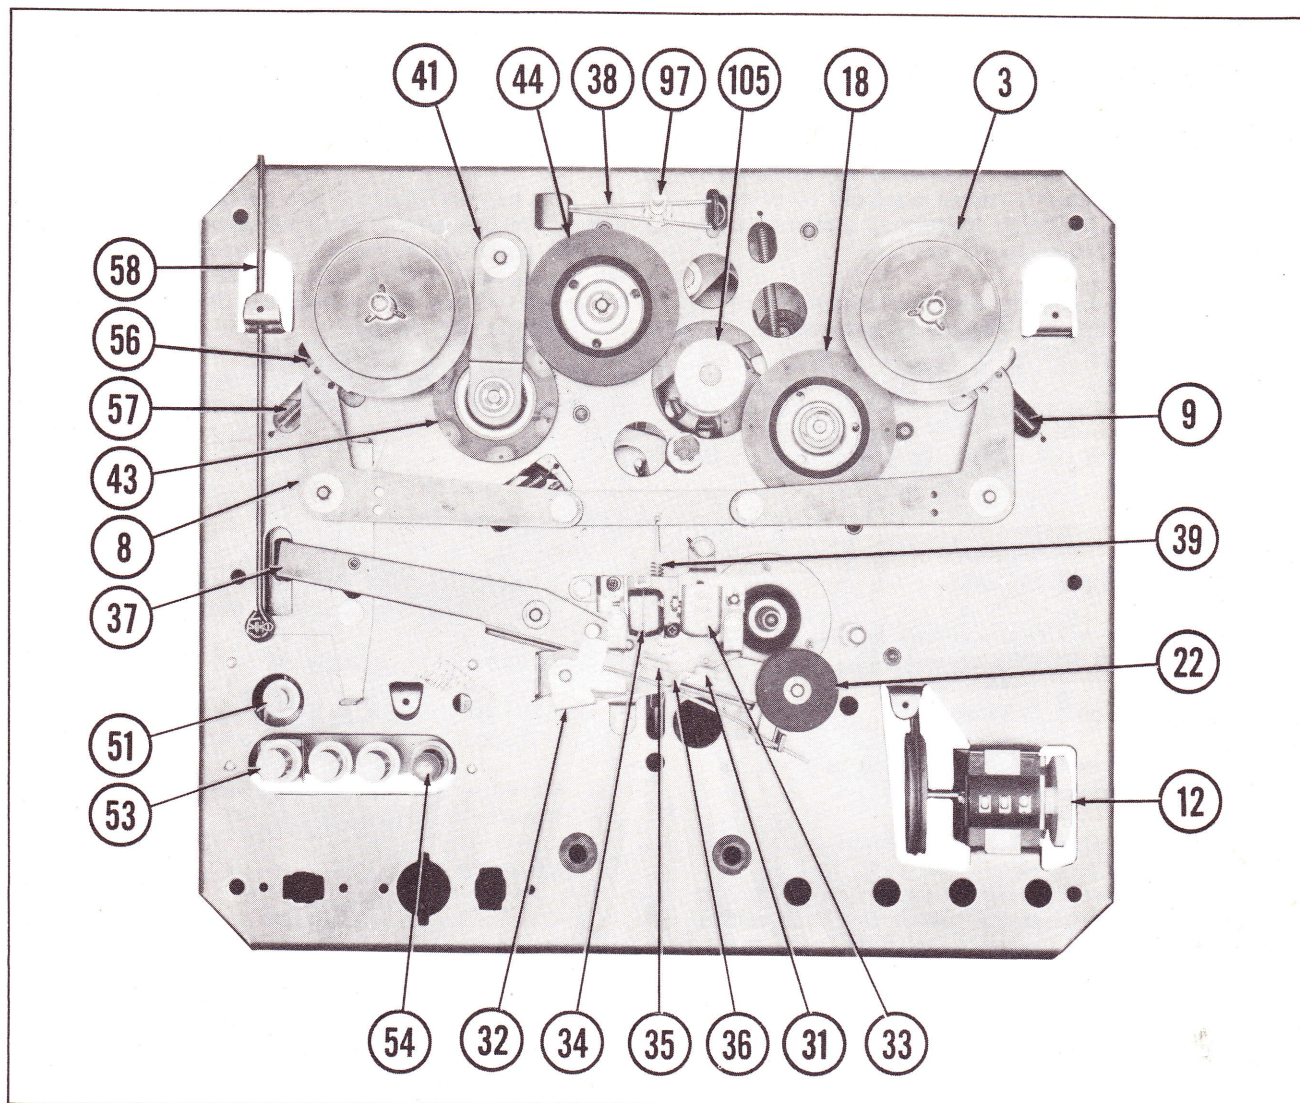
TOP VIEW OF MECHANISM WITH TOP PLATE REMOVED
